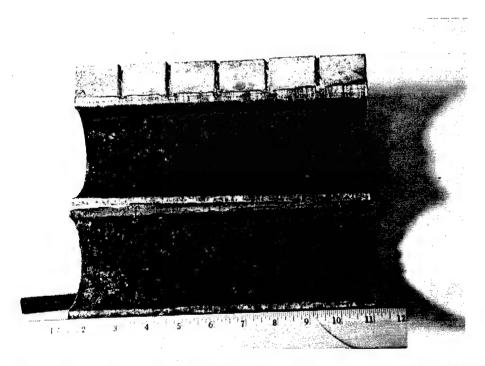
Waterside surfaces of roof tube display heavy deposits on hot side (bottom tube half). Moderate deposits located at the tube membranes with lesser amount on the cold side.
